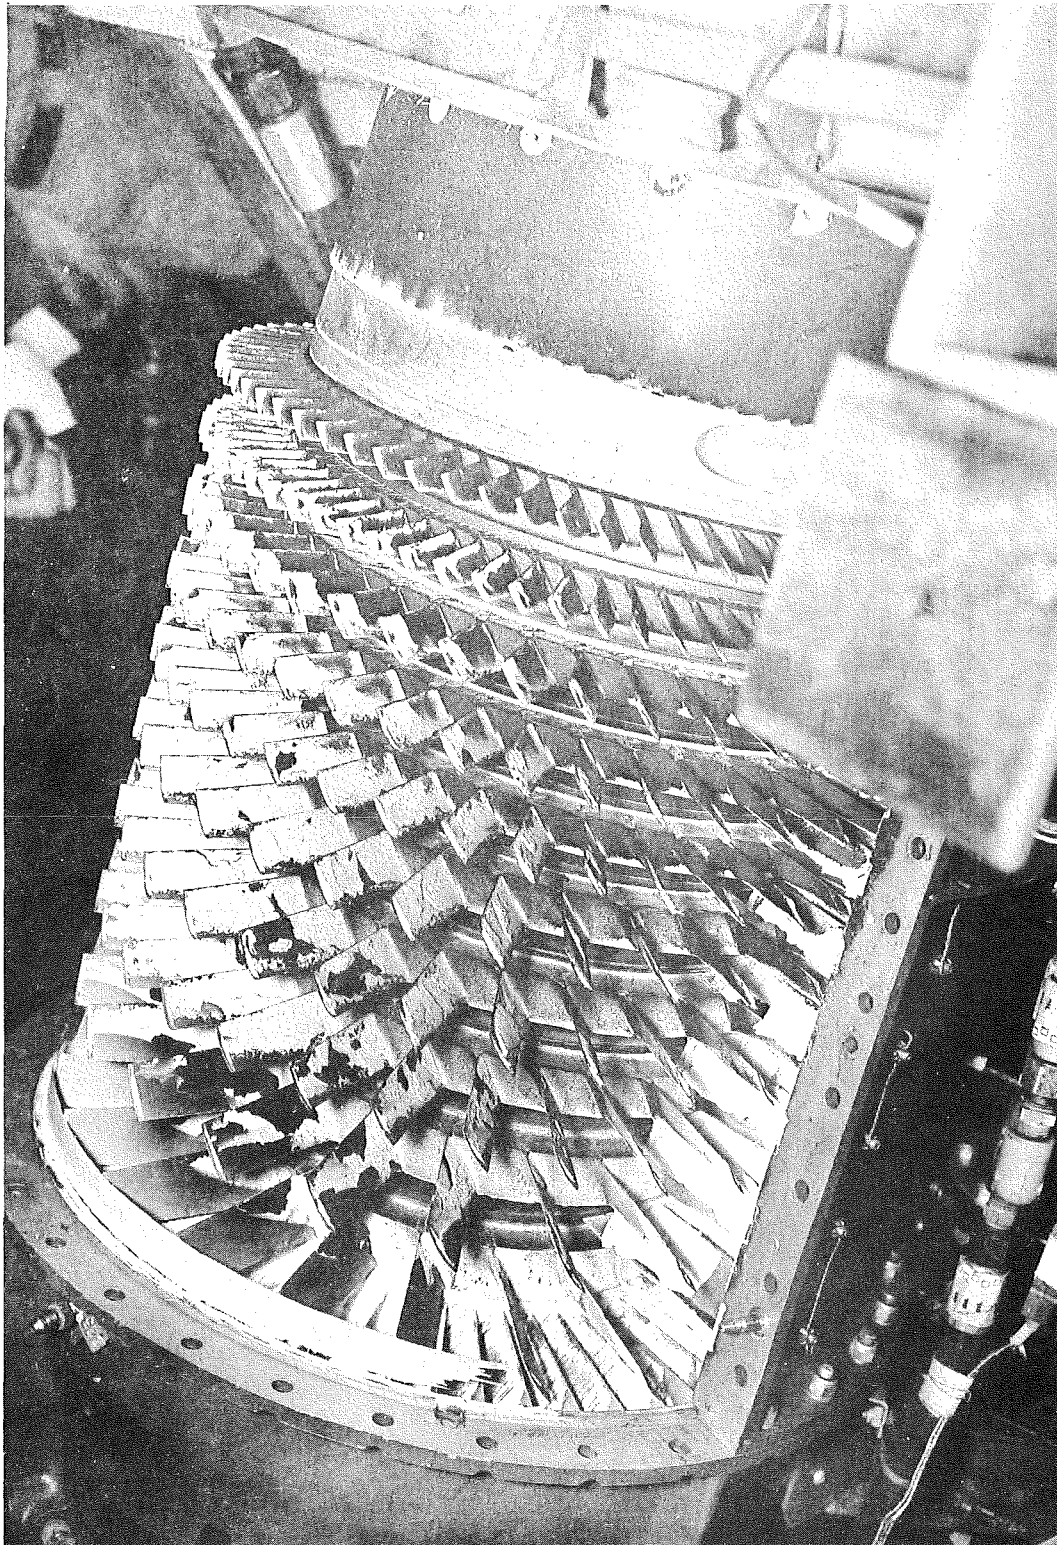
Compressor Assembly, $\frac{3}{4}$ Top View before Boron Oxide Tests
